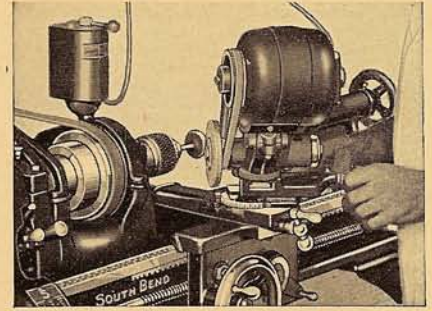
Grinding a Valve Face in the Auto Shop Lathe, using Electric Valve Grinder.
